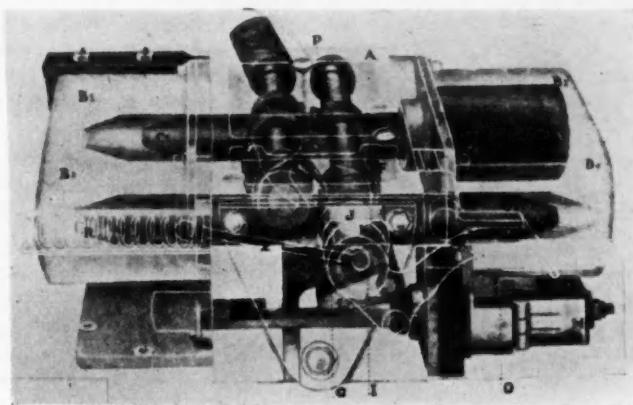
Cutler-Hammer Electric Gearshift Used on the Premier Car
